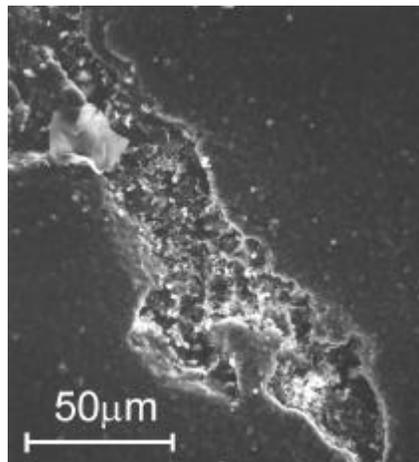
Surface crack on the surface of the Mold SDM Si₃N₄ specimen.
